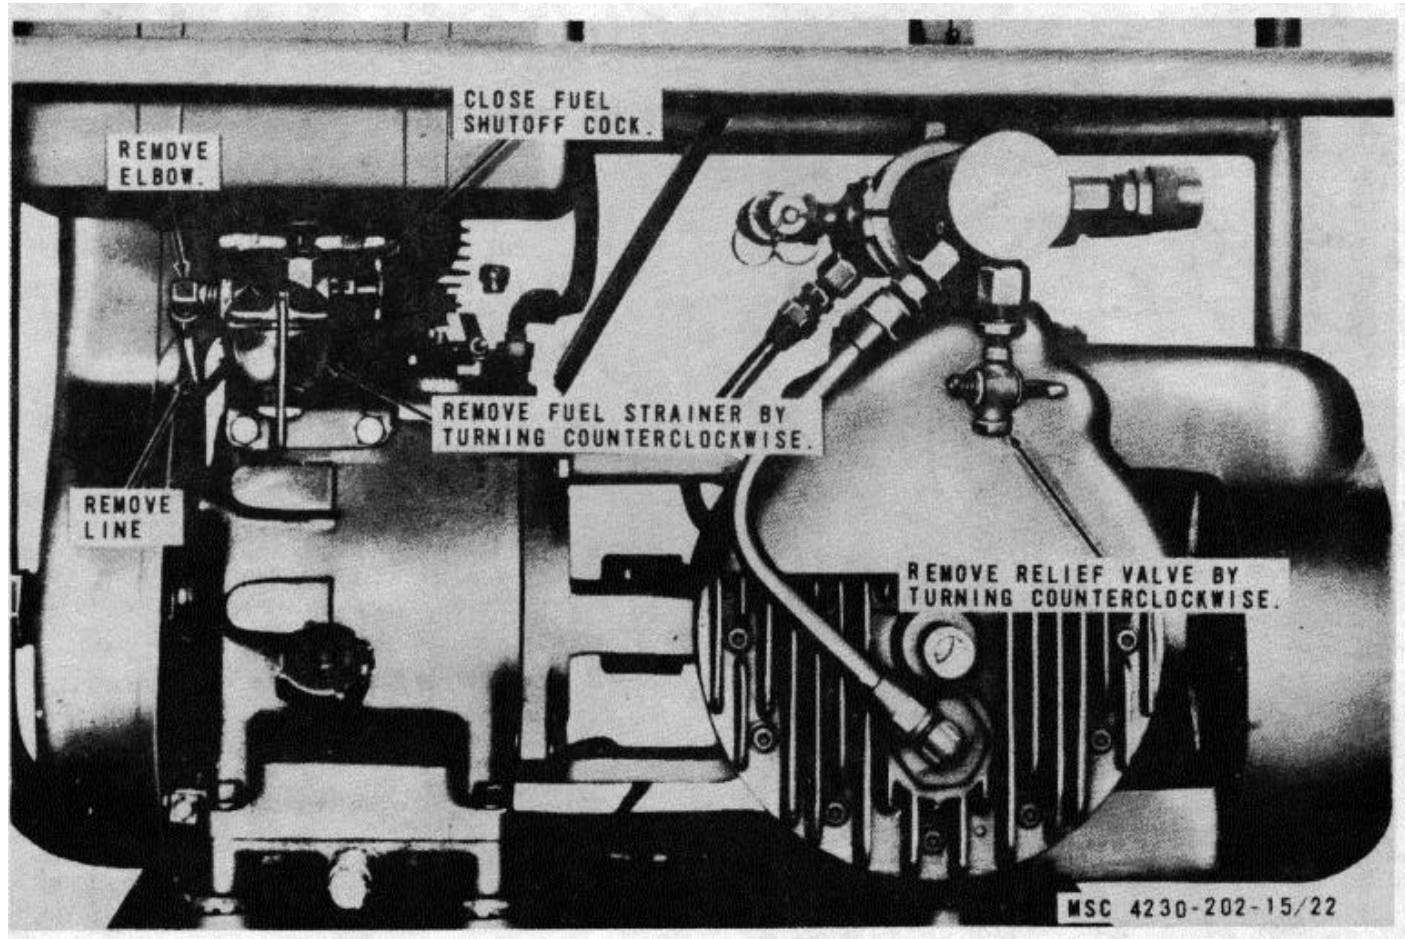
Fuel strainer, line, and relief valve, removal and installation
